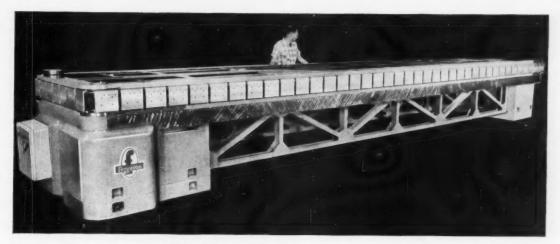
A "Bor-Drilling" operation is shown on a large double-end machine
